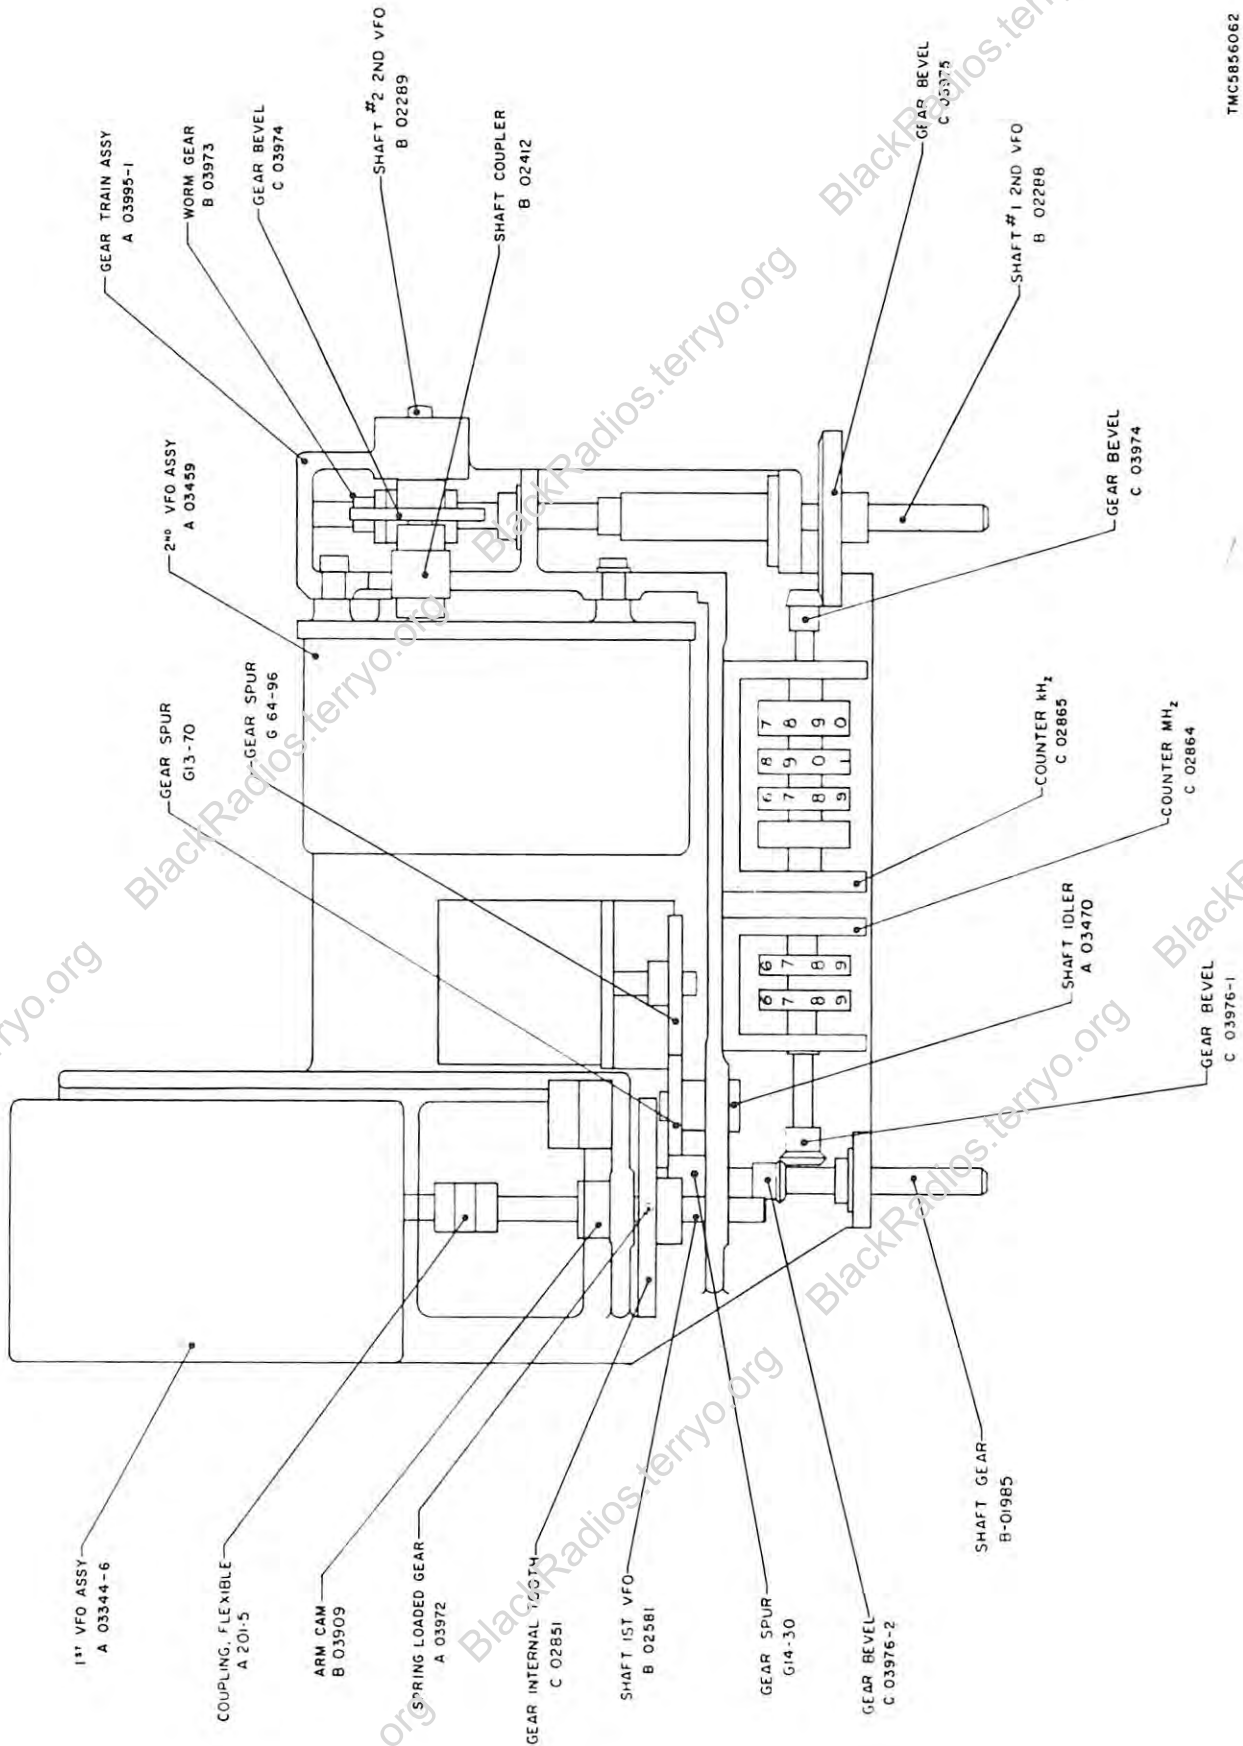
TUNING ASSEMBLY PARTS LOCATION
